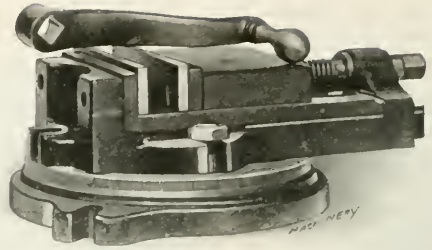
Close View of Bickford Swivel Base Vise shown on Machine in Fig. 1
